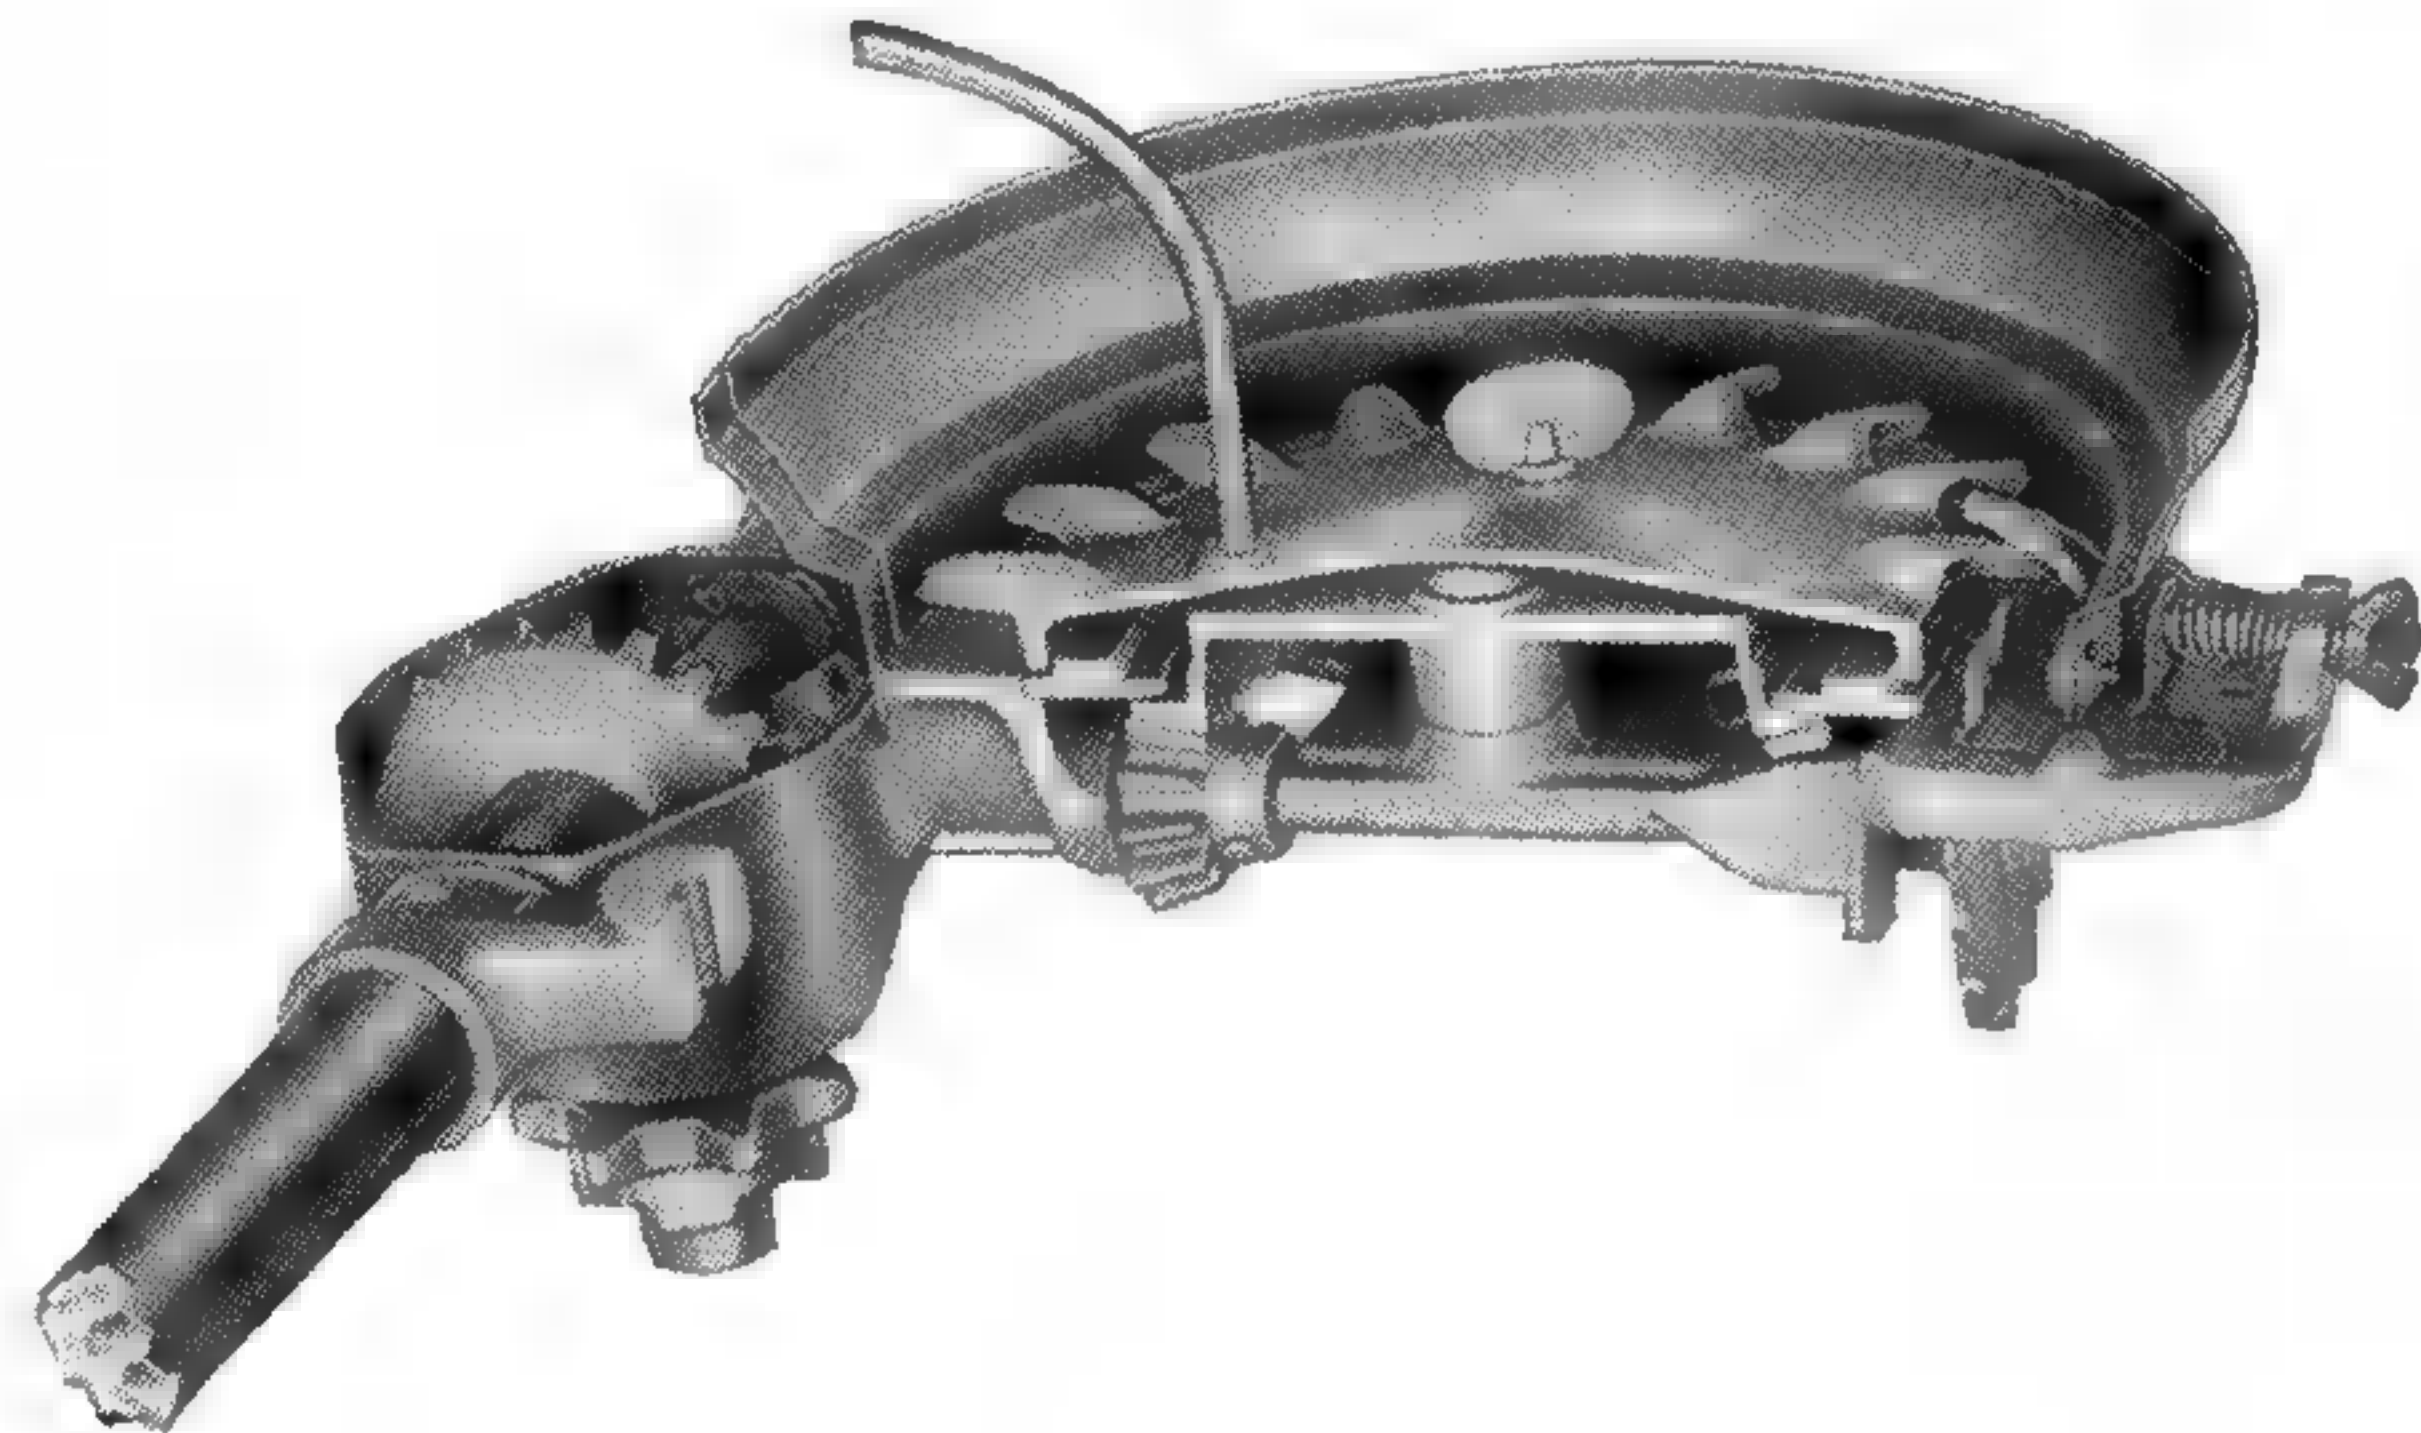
Cross-section of hopper bottom showing cotton plate and picker wheel in position.
